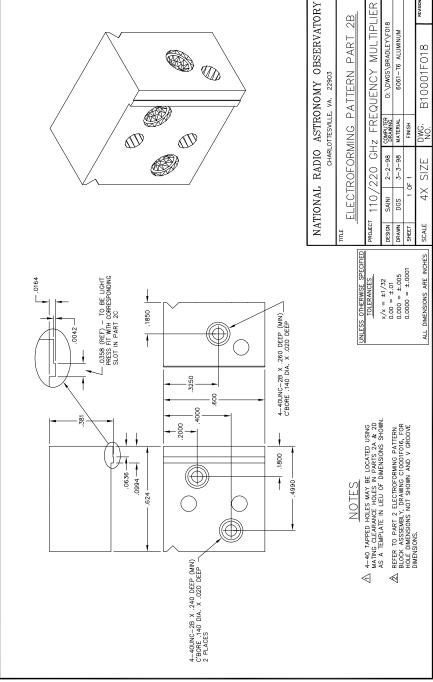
110/220 GHz frequency doubler: Mechanical details of the mandrel
